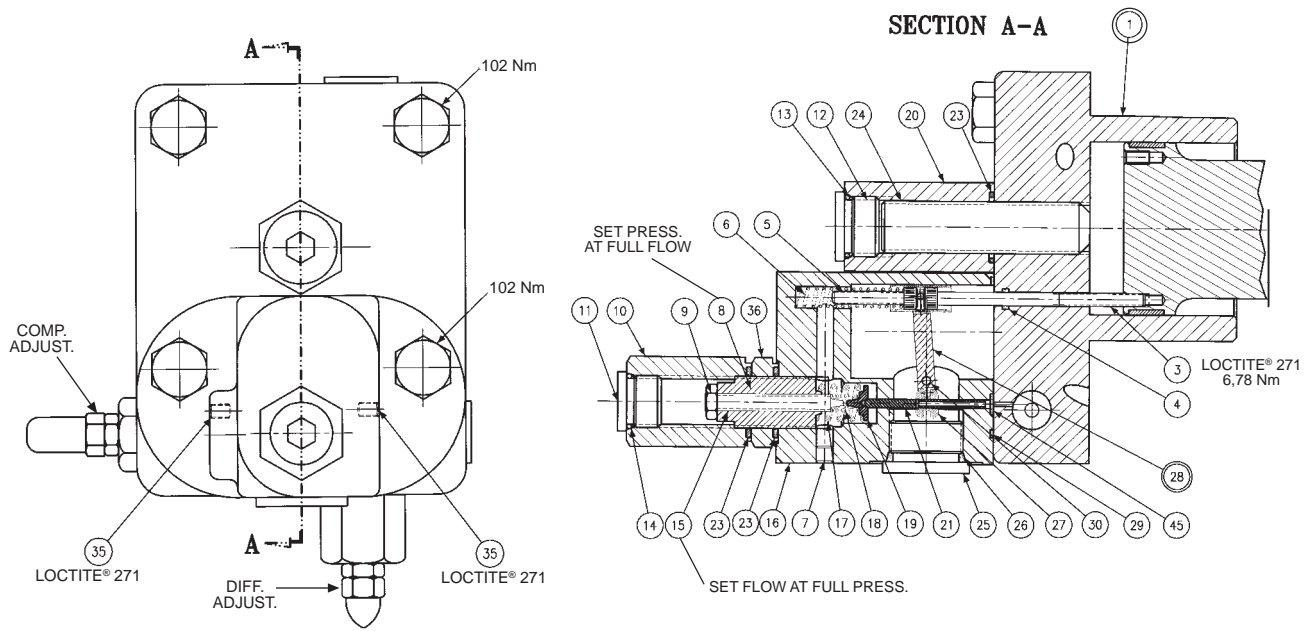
TORQUE LIMITER ASSEMBLY
